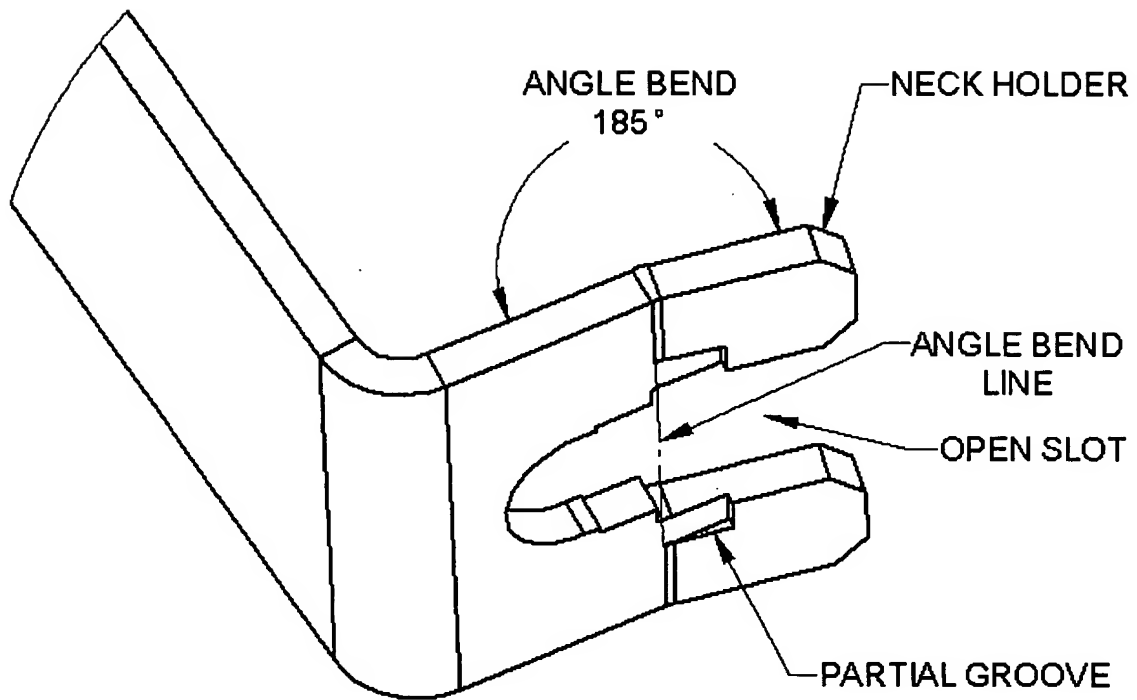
Neck holder with an angle bend and a partial groove to hold different size bottles
